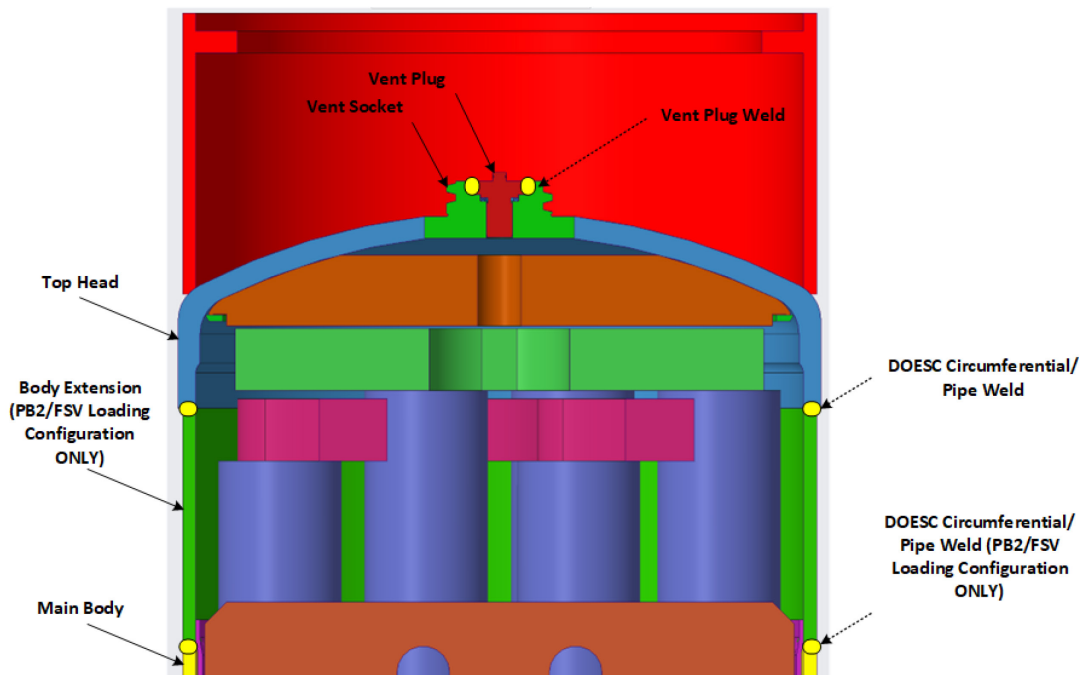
DOESC Closure Welds and Components (diameter mismatch between Top Head and Body Extension is prior to machining)
